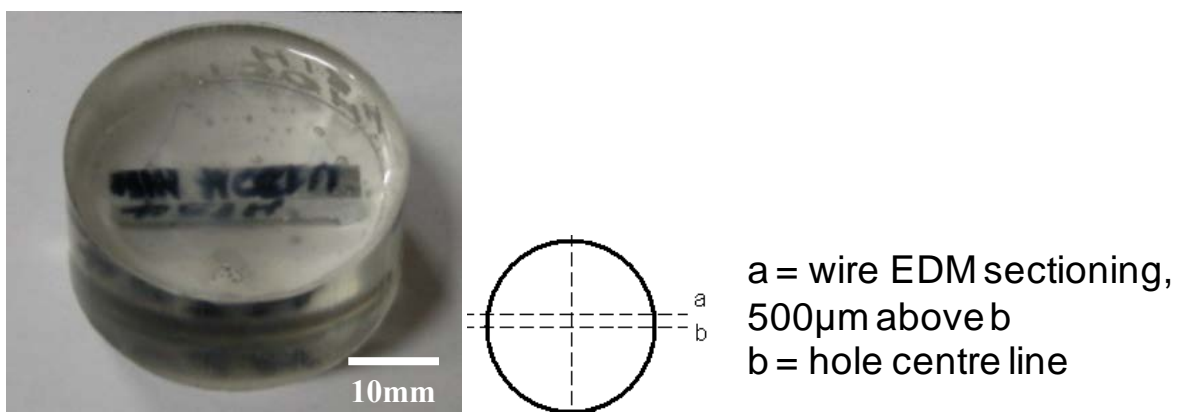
Typical cold resin mounted sample with schematic layout of drilled hole sectioning
